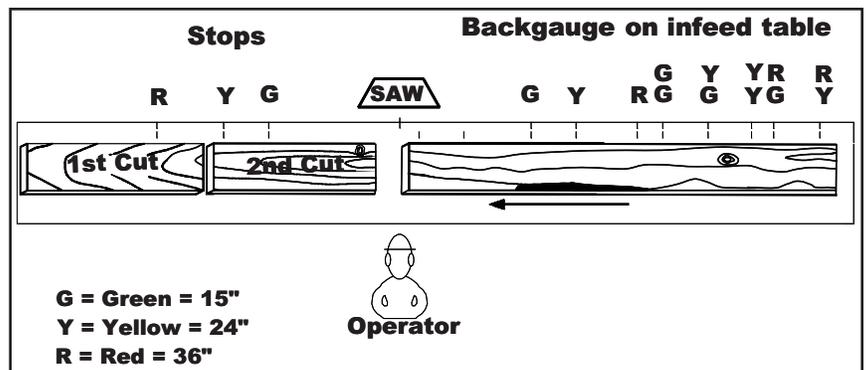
Using the backgauge, the operator first cuts a 36-inch section followed by another 36-inch section containing a defect (that will be removed in the rip operation).
